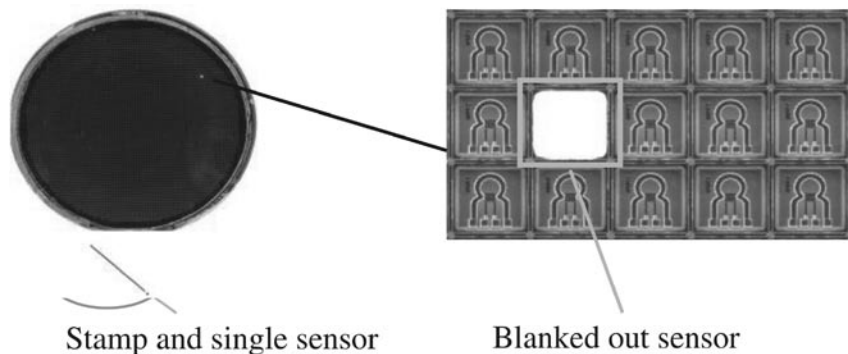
Wafer with stamping tool, enlarged view of the wafer
